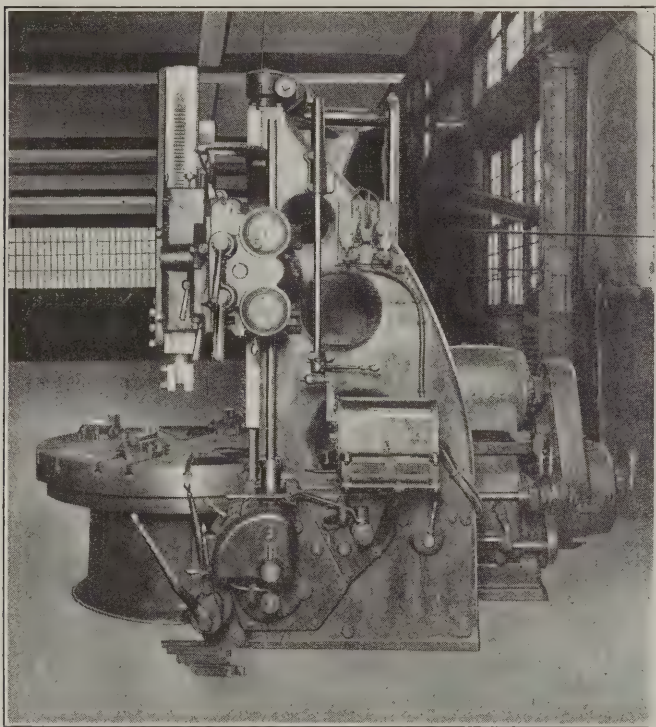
Boring Mill Driven By a 15 Hp. Adjustable Speed Motor
